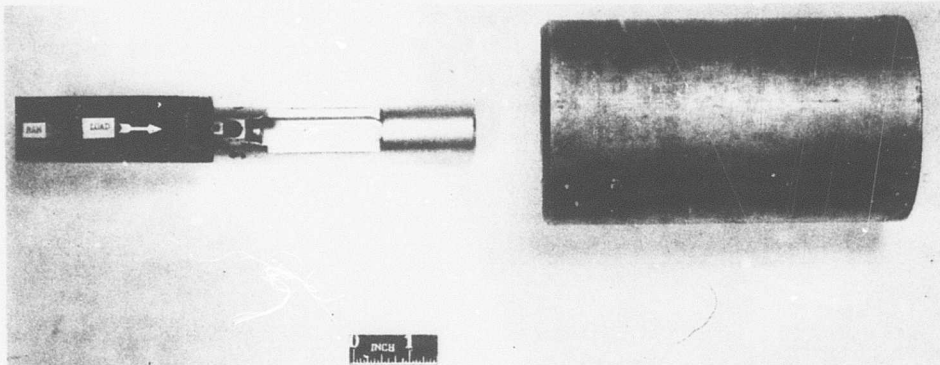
Test Fixtures for Shear Test of Bolt Carrier Key Plunger. Plunger Contact Area of Ram Was Shaped to Radius and Thickness of That of Charging Handle Spring.
